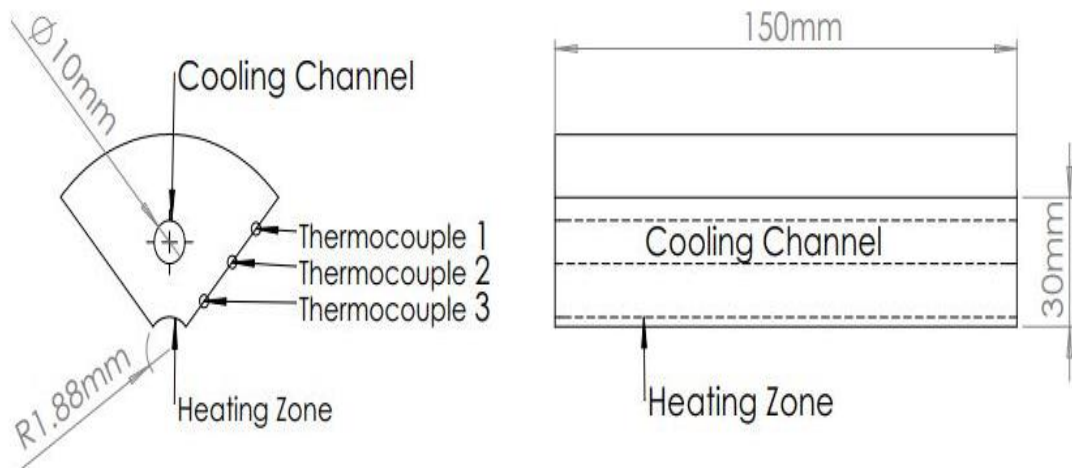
Pressure Die Casting Die Specimen Geometry-2
